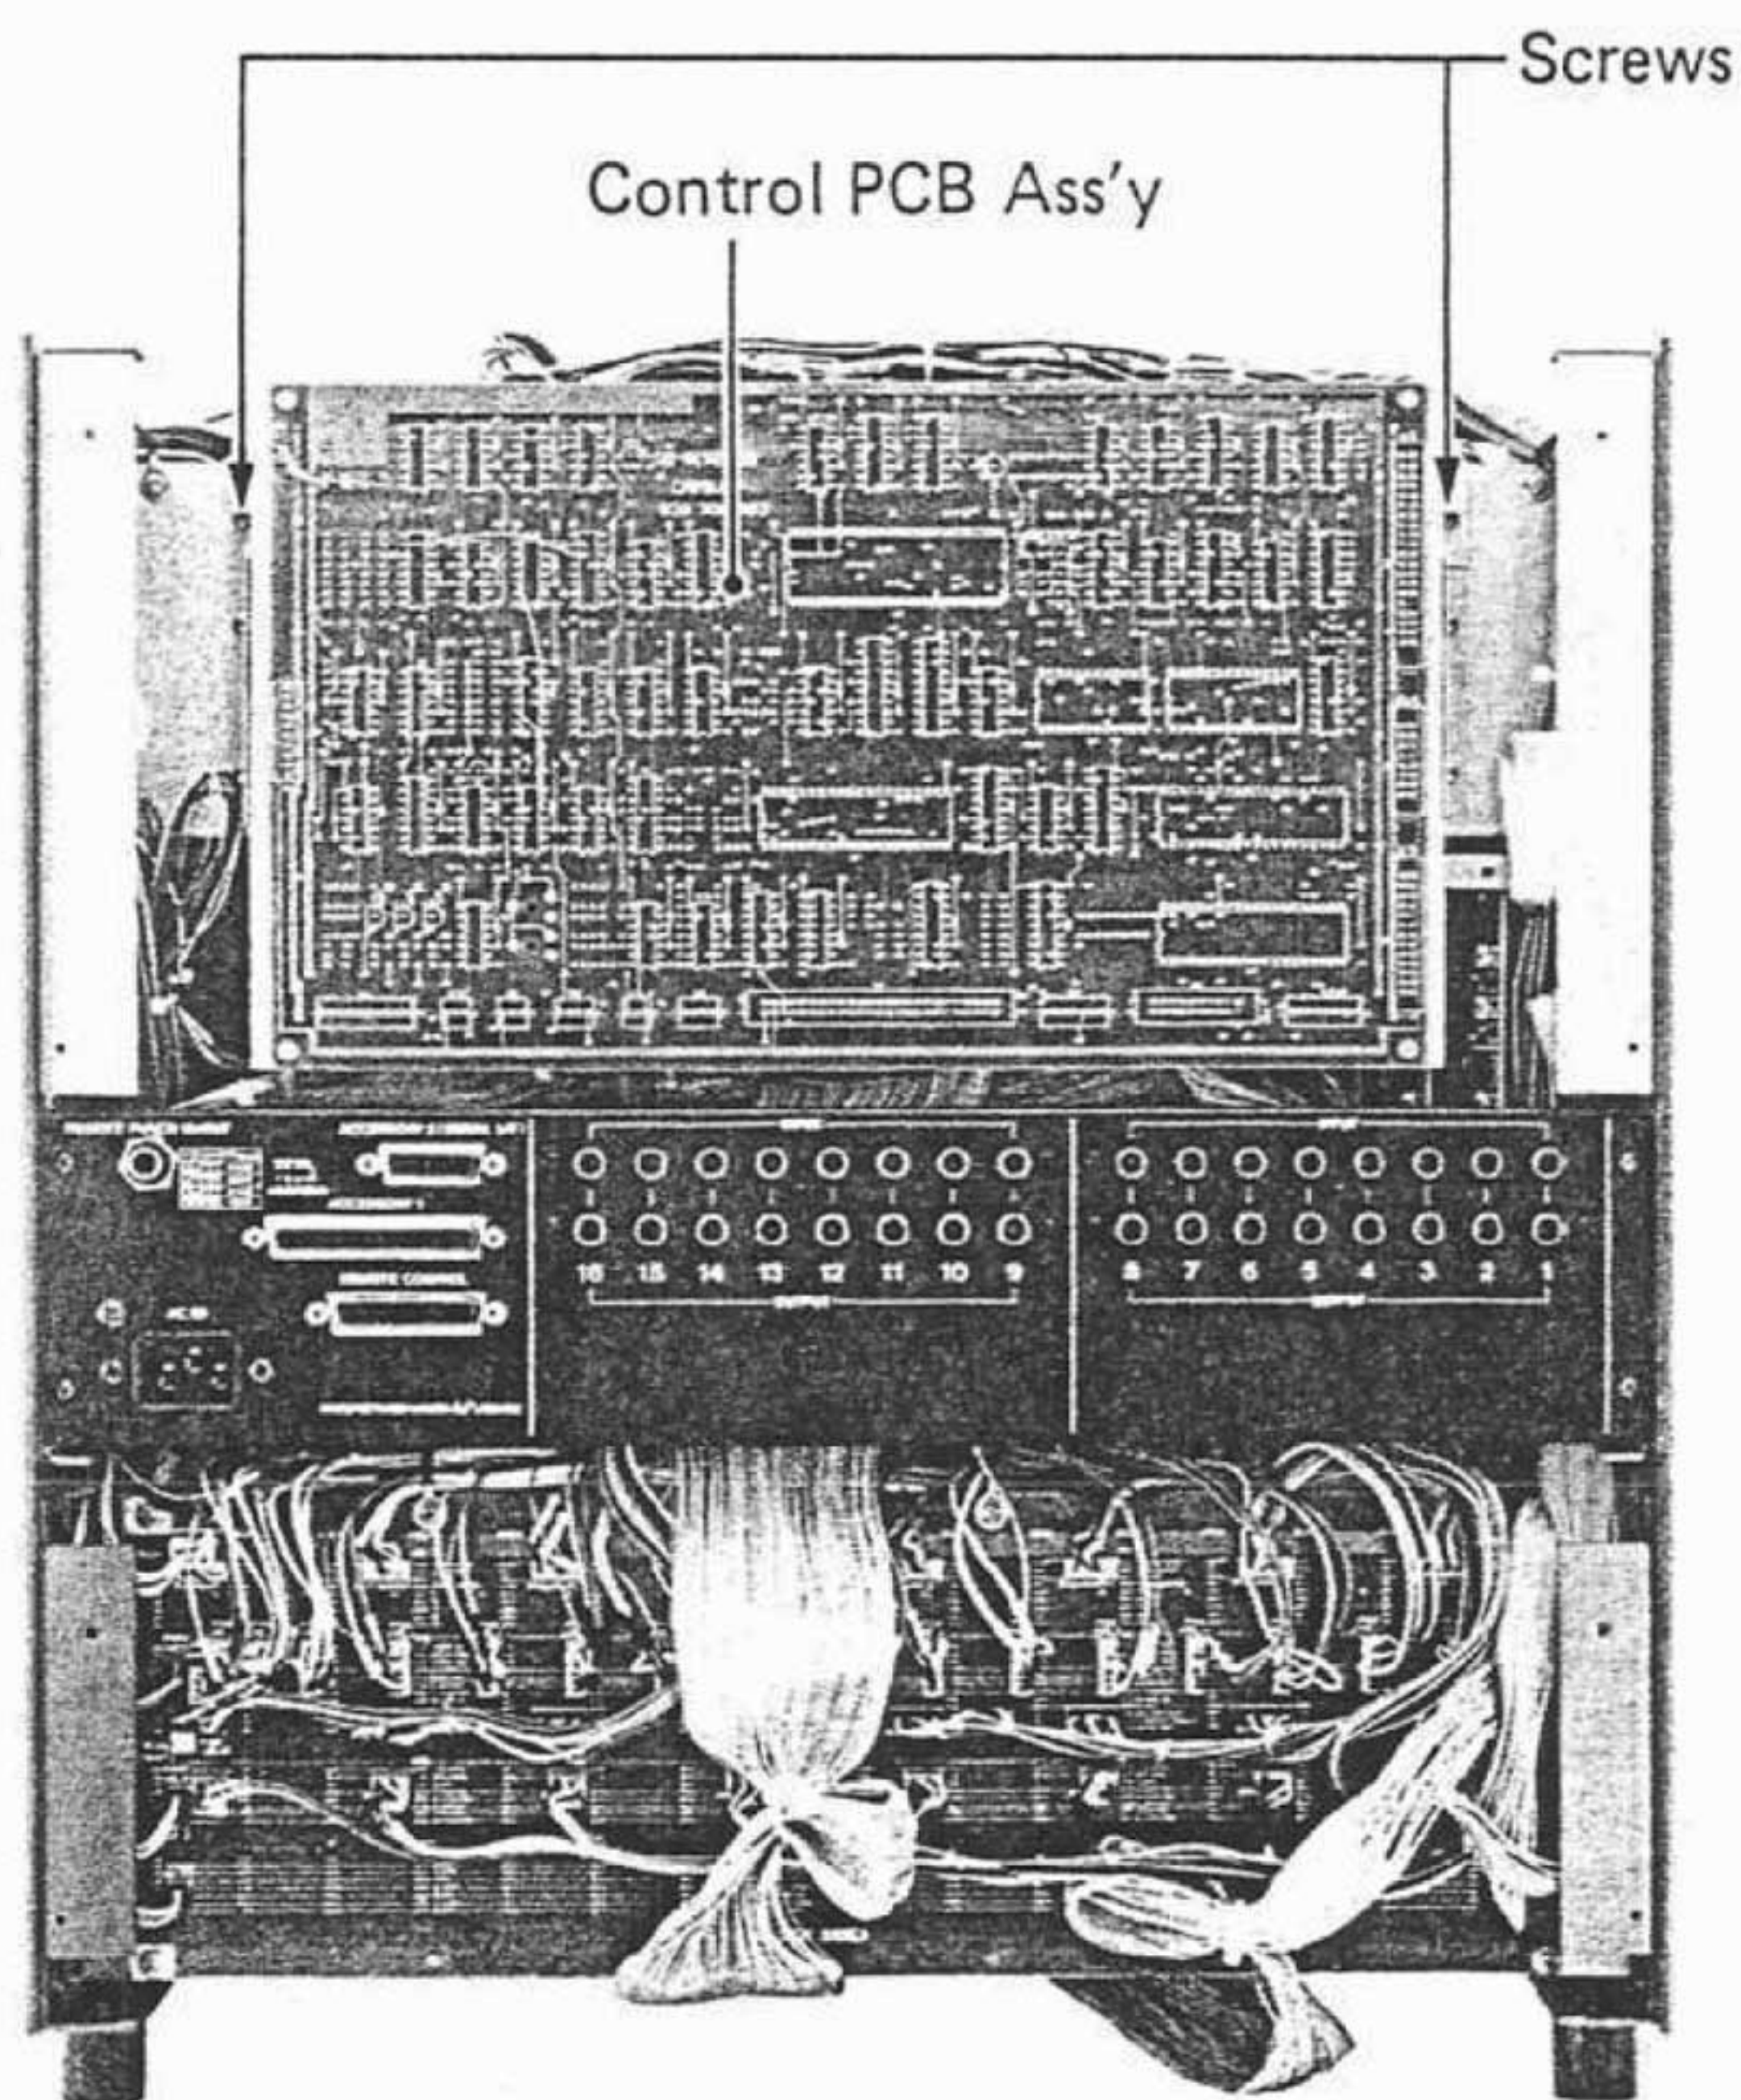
CONTROL PCB INSIDE THE TOP REAR PANEL
